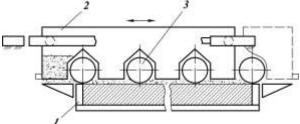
Scheme of roller forming of flat products: 1 - mold; 2 - supply hopper; 3 - roller trolley
